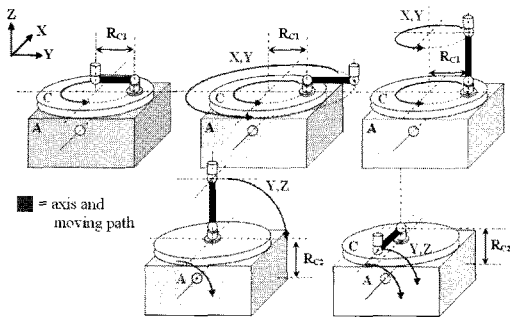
Five possible test configuration to check geometry error of rotary axis in five-axis machine
